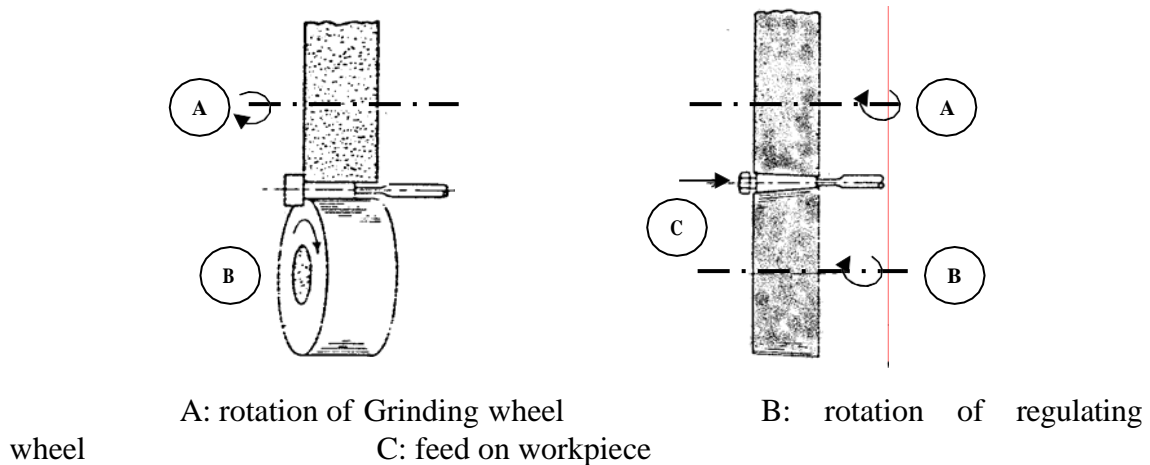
Centreless (a) In Feed and (b) End Feed Grinding
